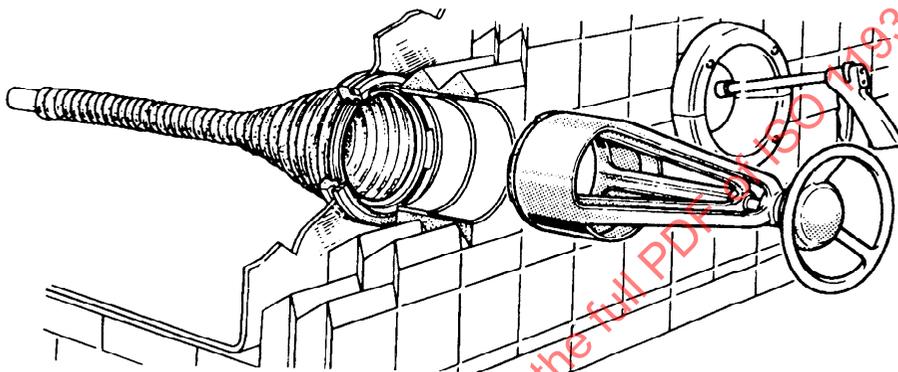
Remote-handling tong gaiter for type 1 ejectable support rings
